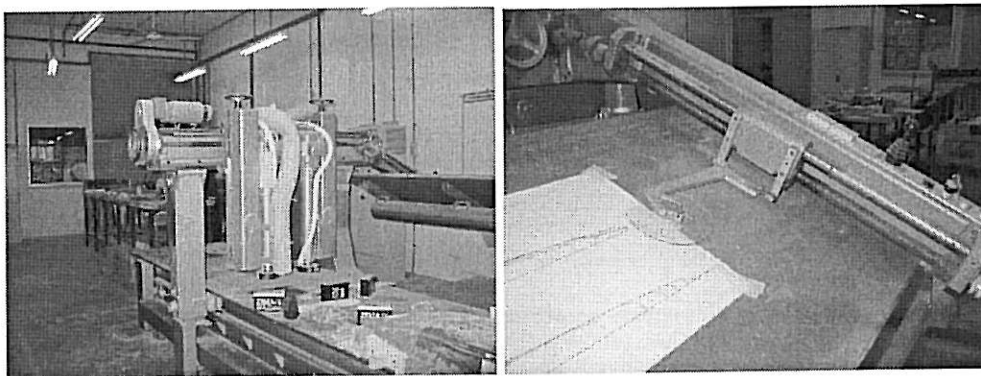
Machine used (Courtesy from MarinLab UTM)
